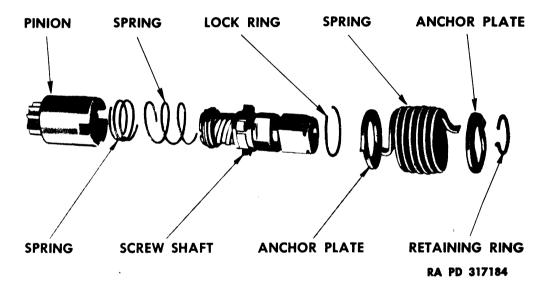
Bendix Drive for MAY 4137 Cranking Motor
